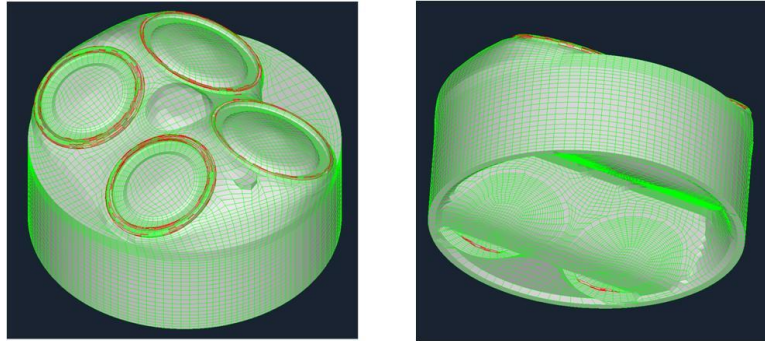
3-D CAD geometry of the target engine combustion chamber
